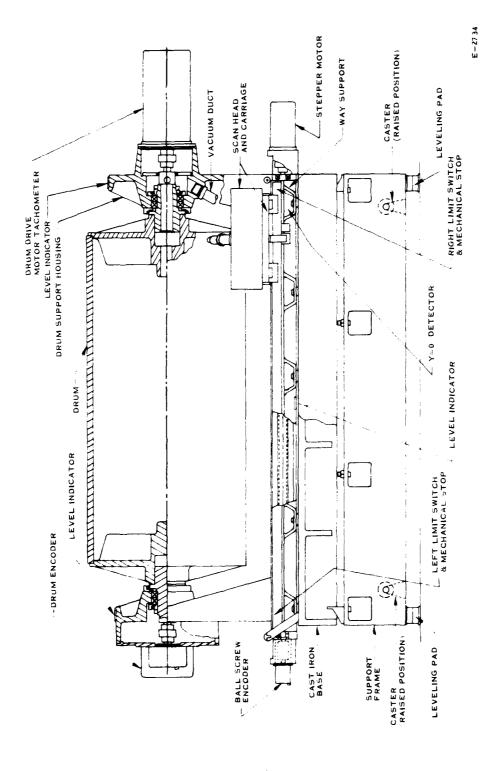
DRUM SCANNER UNIT, FRONT VIEW
